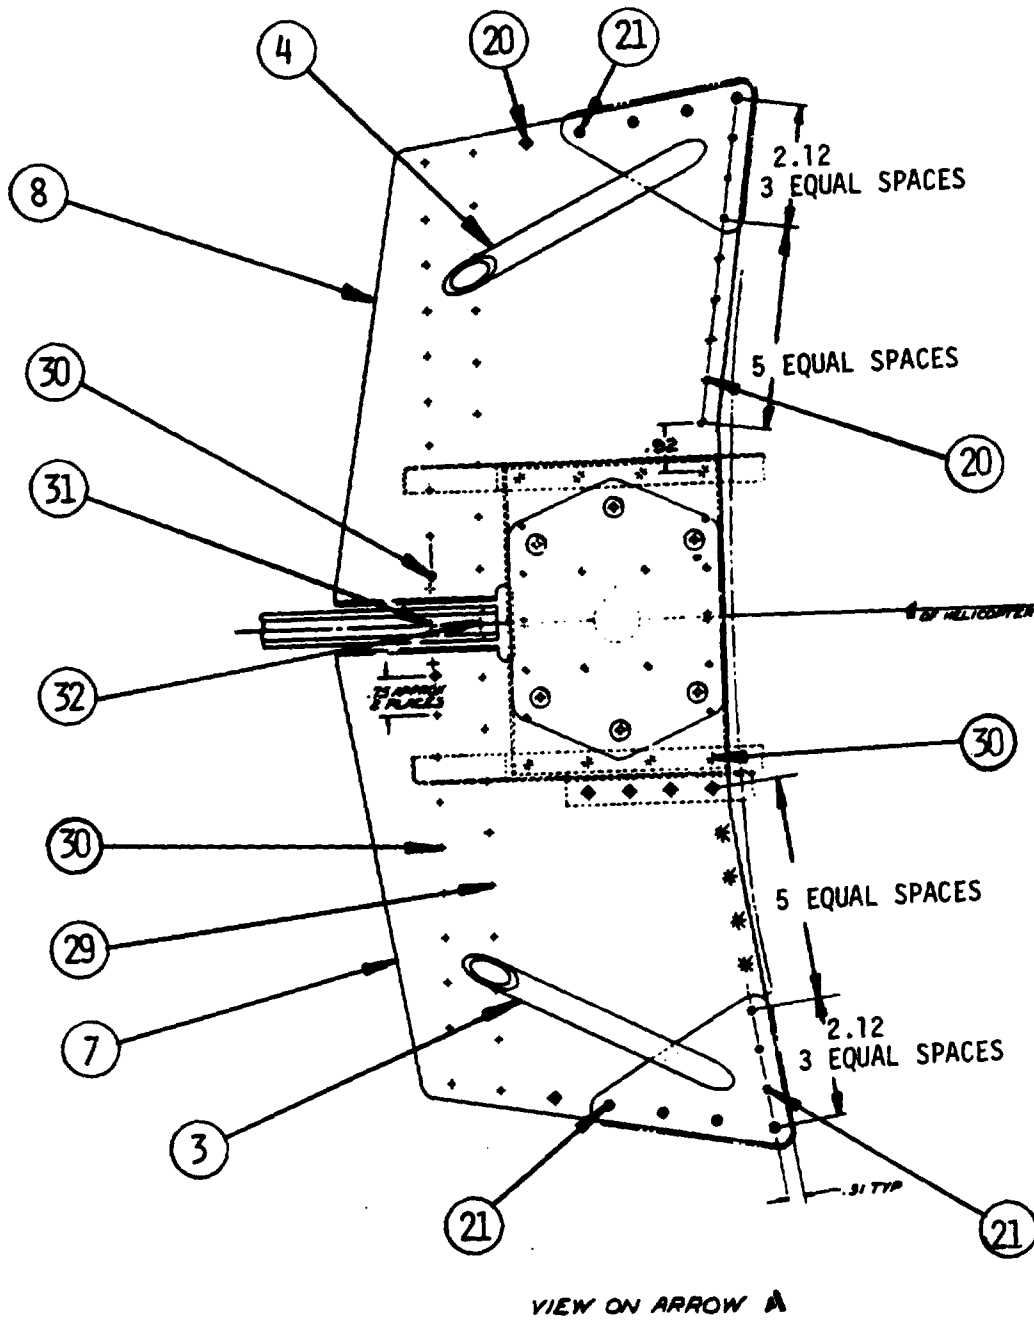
UPPER CUTTER INSTL. - SHEET 2 OF 3
